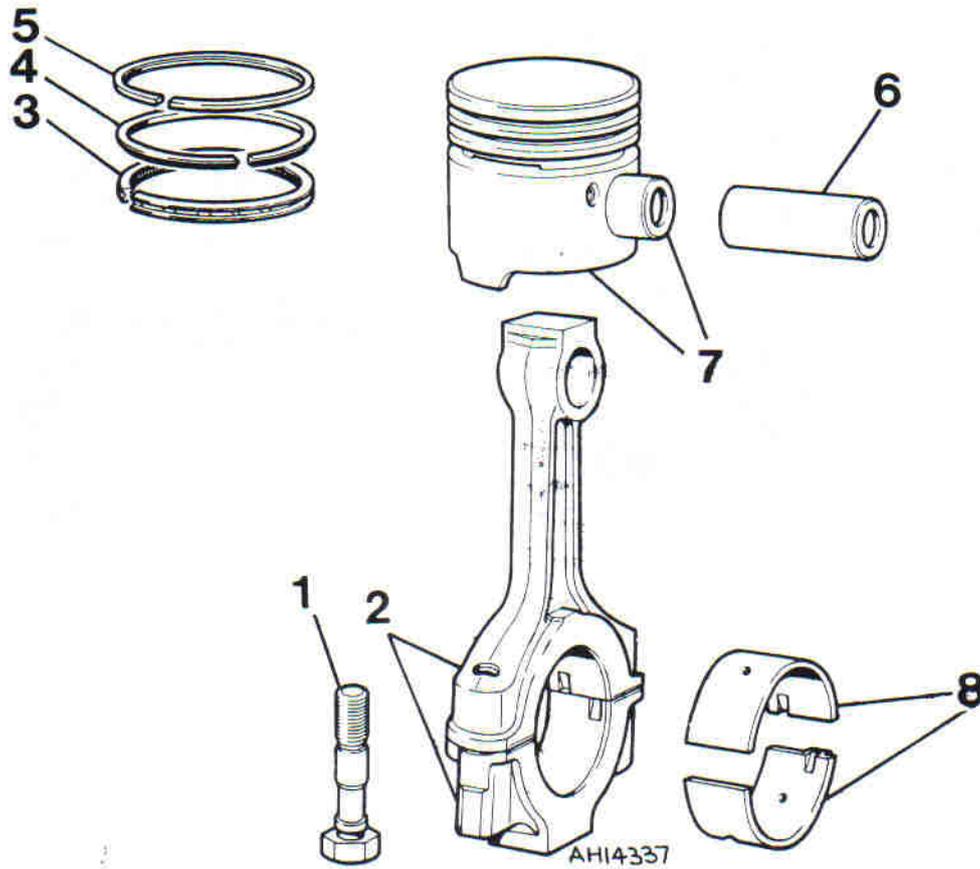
Components of piston/connecting rod assembly (Sec 9)
